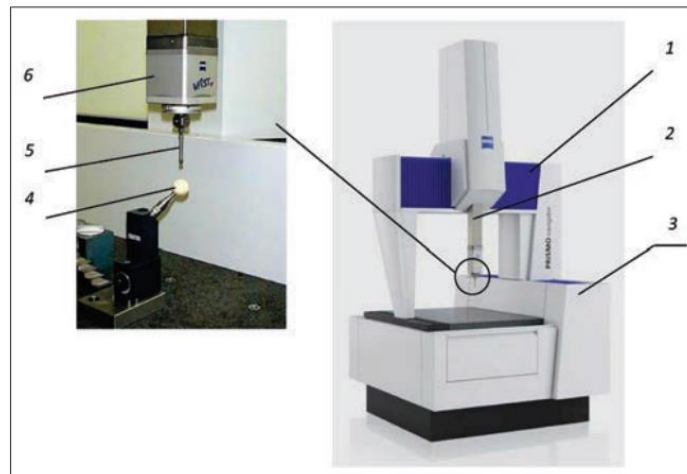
Coordinate measuring machine Zeiss Prismo Navigator: 1 - portal, 2 - pinola, 3 - side portal drive, 4 - standard ball, 5 - spindle, 6 - Vast measuring head [3]
